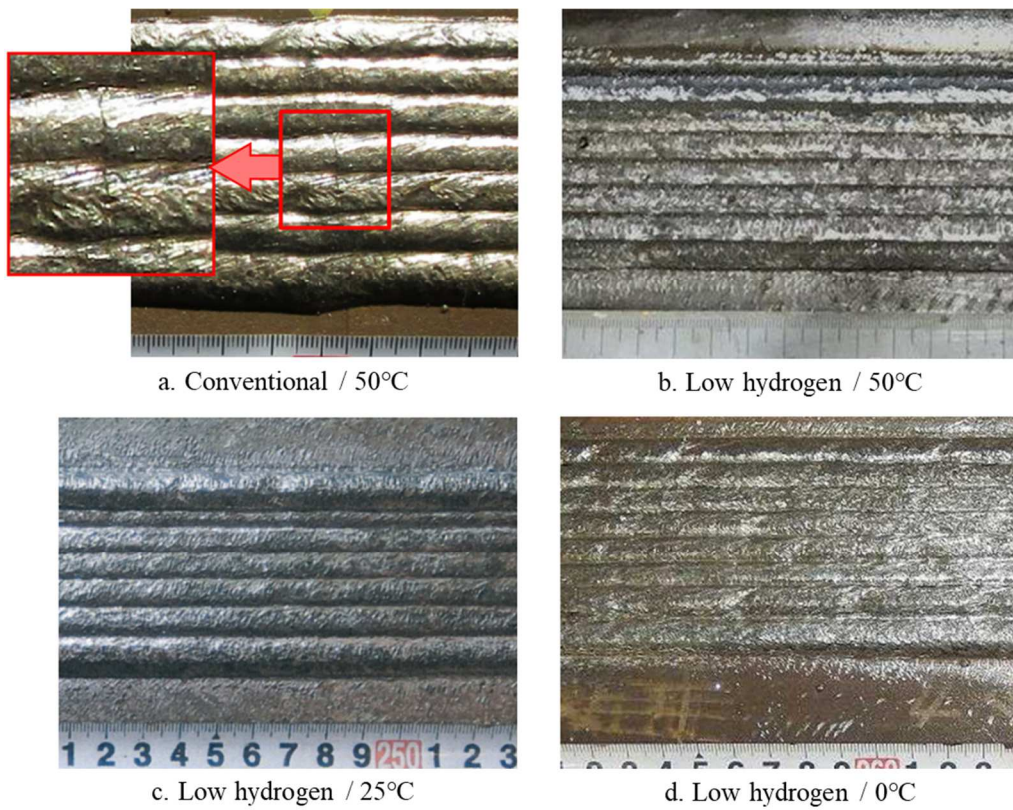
Appearance of weld bead surface of last layer
